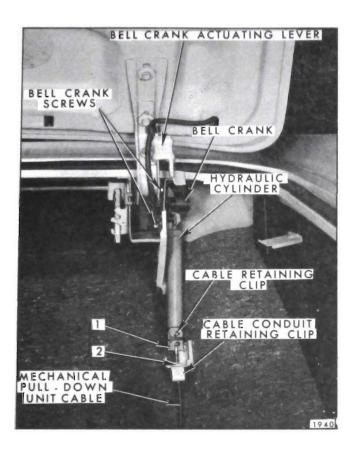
Mechanical Pull-Down Unit Hydraulic Cylinder
